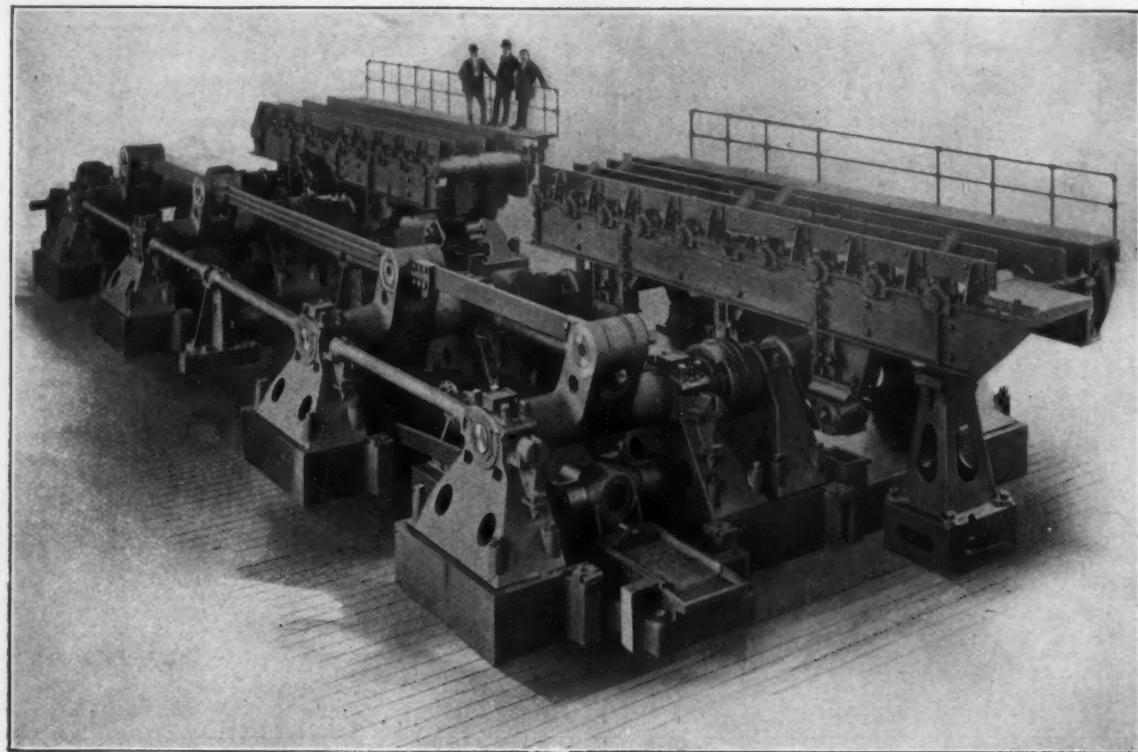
Lifting Tables for the 40-In. Blooming Mill—Table Side.
